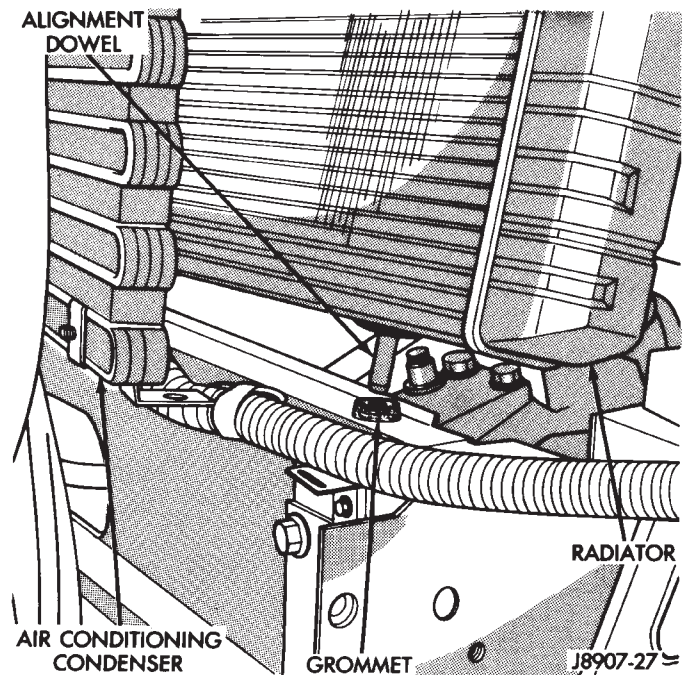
Radiator Installation—XJ Models with 4.0L 6-Cylinder Engine
